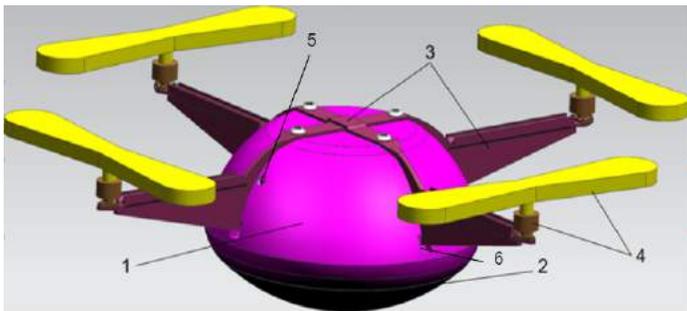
(Quadcopter. 1 Main frame; 2 Bottom Part; 3 Arms; 4 Motors and Propellers; 5 Wire holes; 6 Claw grip)
